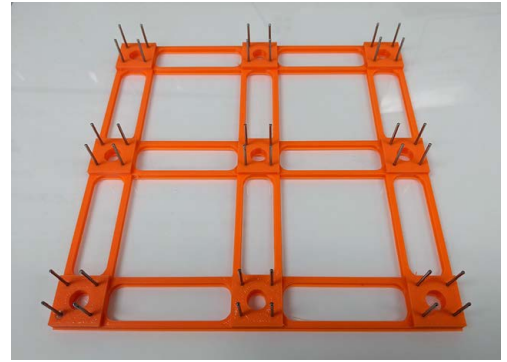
The 3D-printed jig used to form all 36 via holes required for the stretchable grid: 9 nodes with 4 vias each. Each hole is formed by a 1 in.-long, 1/16 in. diameter dowel pin that has been press-fit into the jig. The jig is skeletonized so that uncured silicone can be poured through the jig without disturbing its position.
